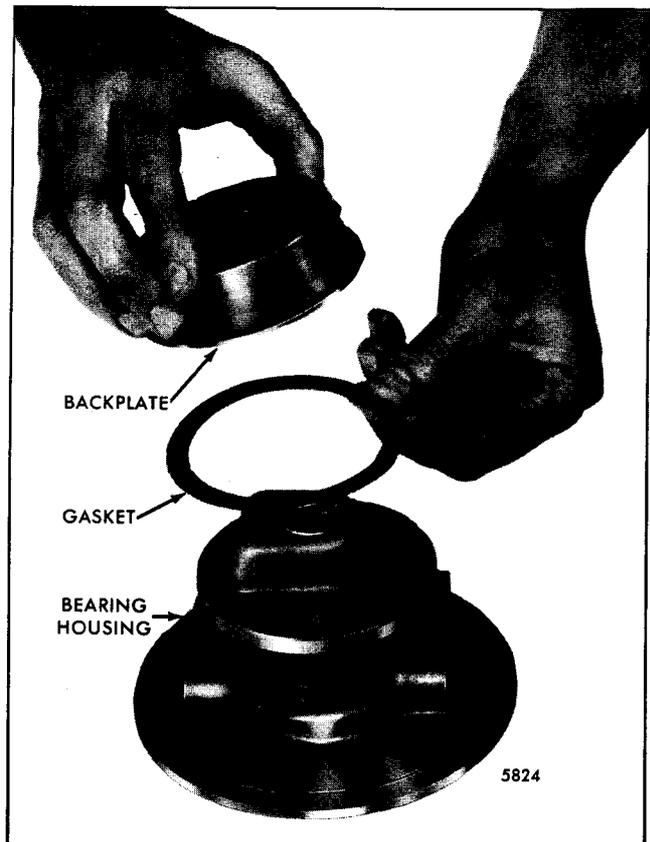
Assembling Bearing Housing, Gasket and Backplate
